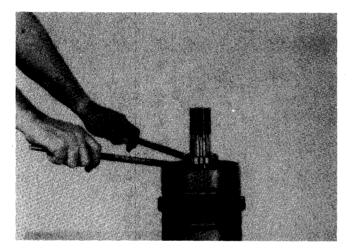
Pry inner bearing up far enough to use a bearing puller.
